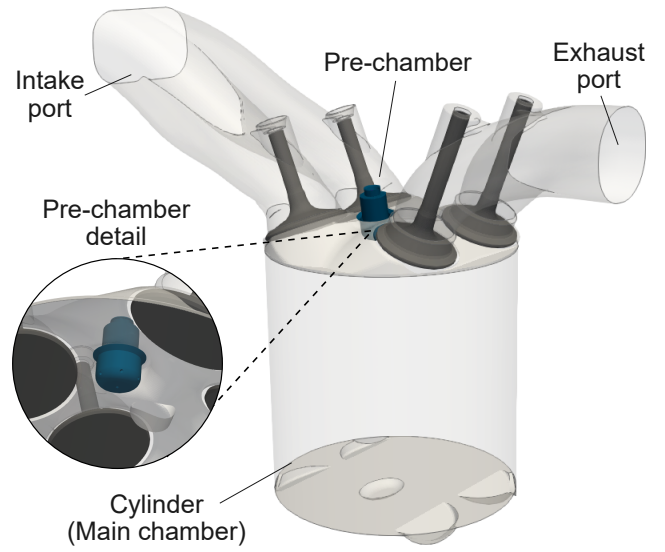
Outline of the pre-chamber and combustion chamber design including the intake and exhaust ports geometry.
